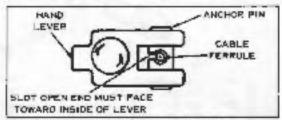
G-1A. Correct Handlever Control Cabile Assembly
